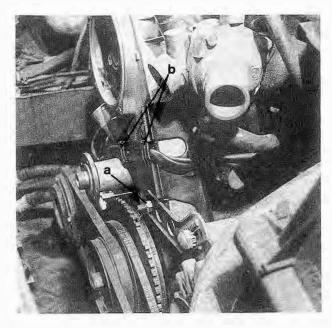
Upper alternator mounting bracket nut (a) and wire holder retaining clips (b) on camshaft drive belt cover.
